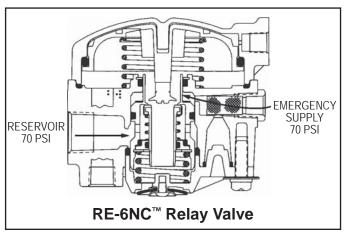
RE-6NC™ RELAY VALVE CHARGING ABOVE 70 PSI
